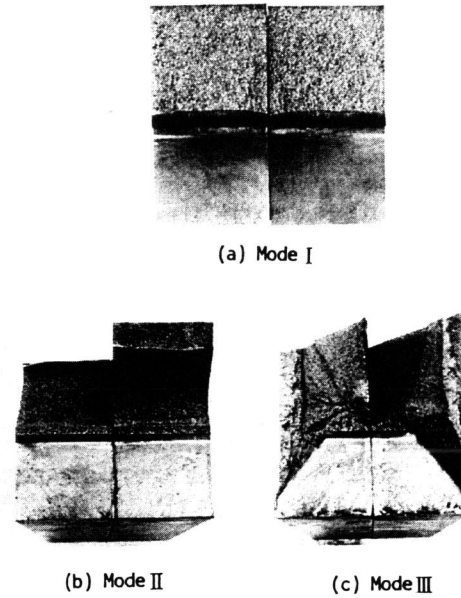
An example of fracture surface of test pieces after fracture mode test (DCI).
